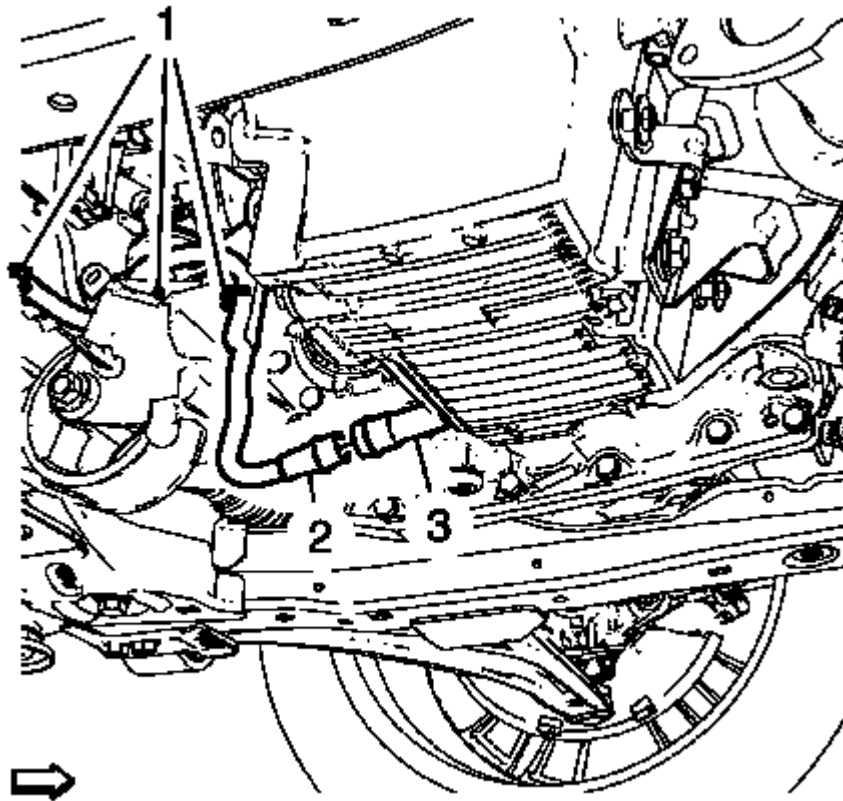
Engine Oil Level Sensor Wiring Harness Plug
